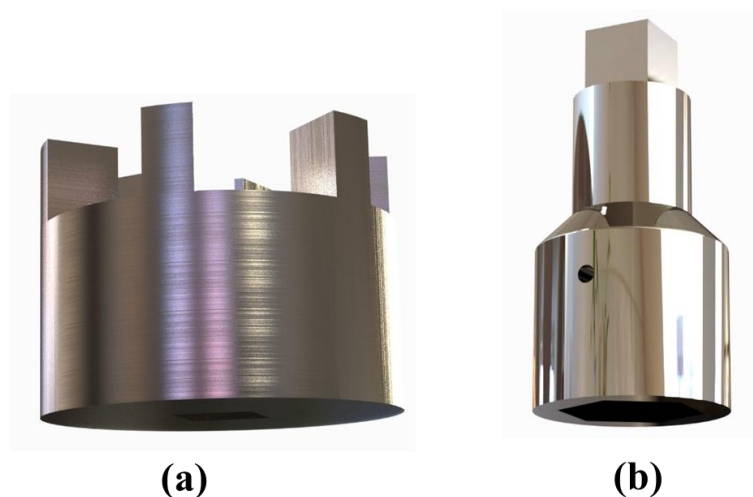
(a) Coupler and (b) Adapter to connect rotary sensor of the traction machine
